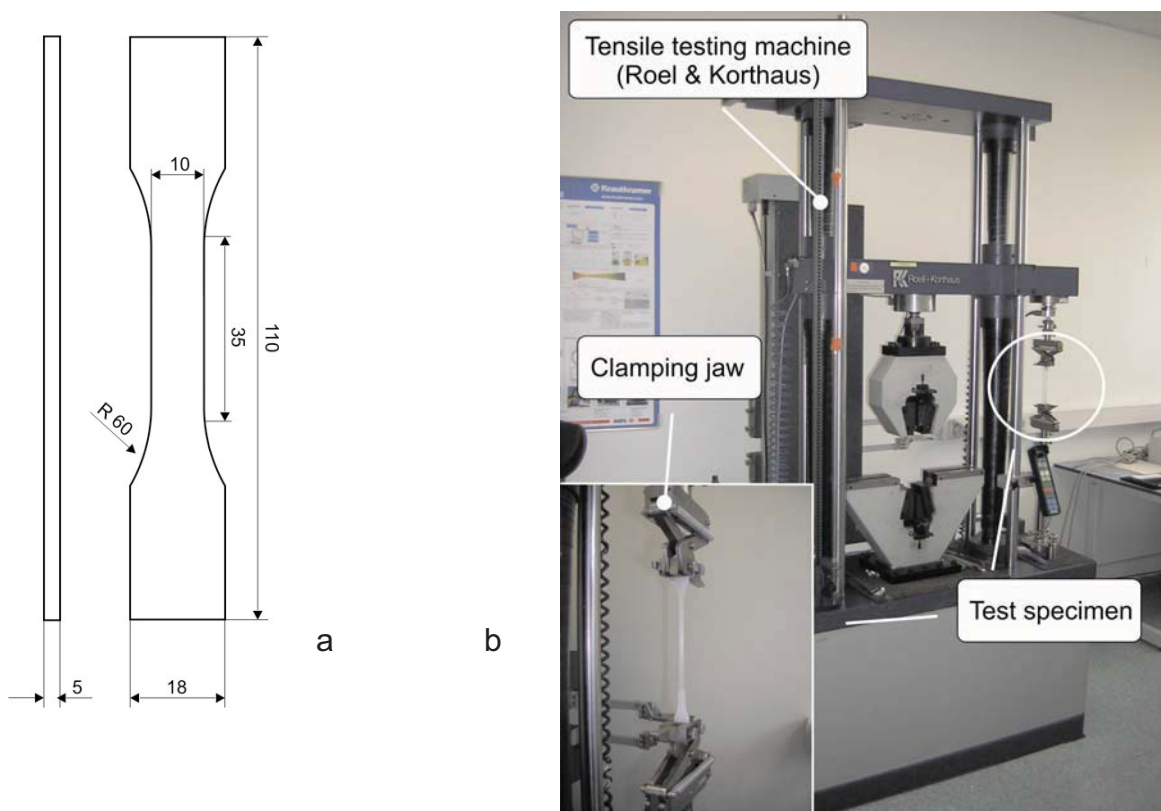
a) Modified shape of the test specimen b) Picture of Tensile Testing Machine.
